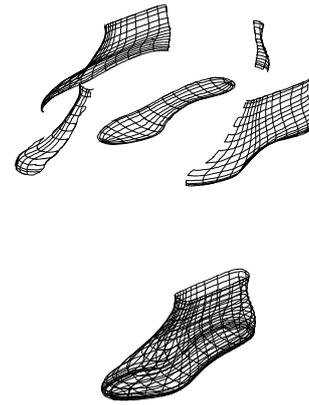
Complex dimensional and geometrical measurement model based on coordinate metrology.
